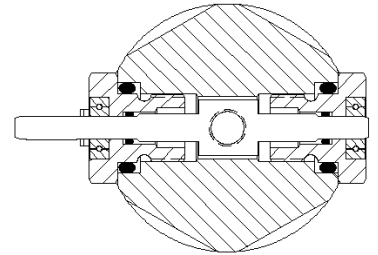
End-on cutaway view of controller body. As shown, the case would mount to the left of the body.
